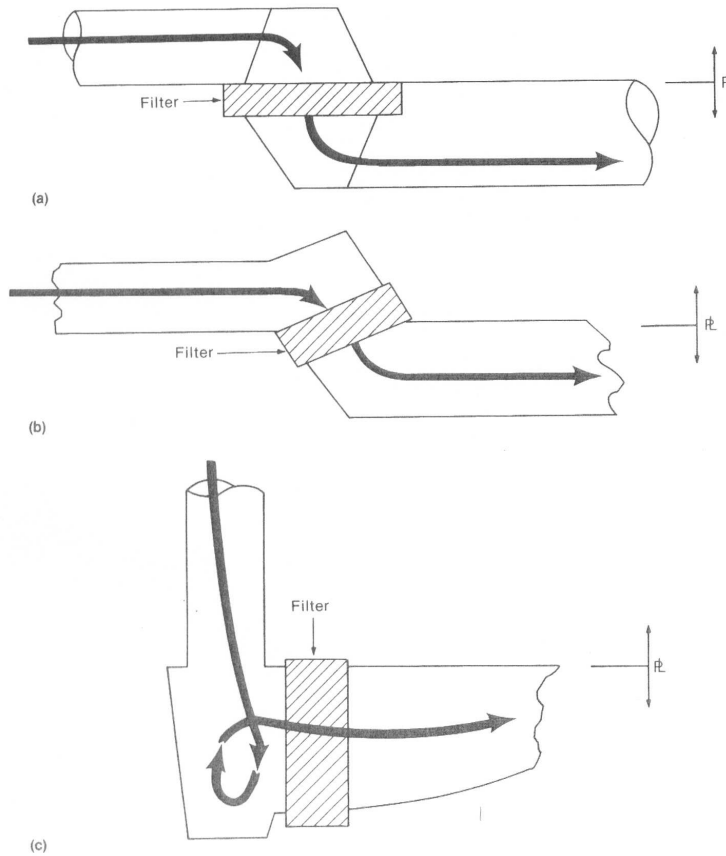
Common methods of filter placement in horizontally parted molds. (a) Parallel to parting line. (b) Between 0 and 90° to parting line. (c) 90° to parting line. Arrows indicate the direction of metal flow.
